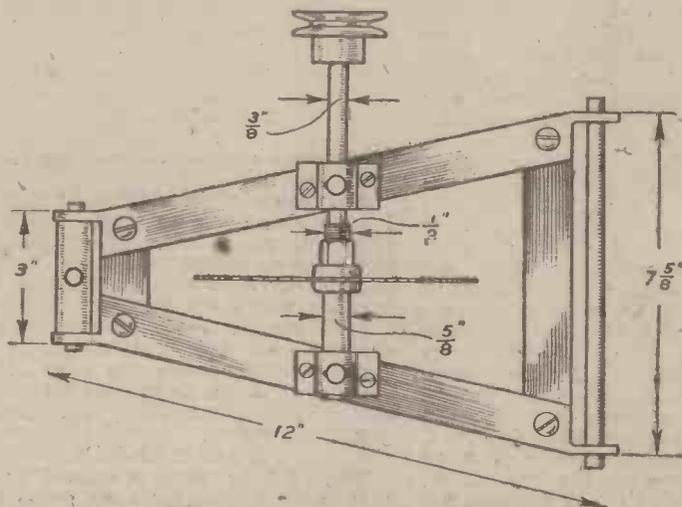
Plan of the tilting frame with saw and driving shaft in position. Fig. 2.—End view of bench, showing the rod for guiding the fence.
